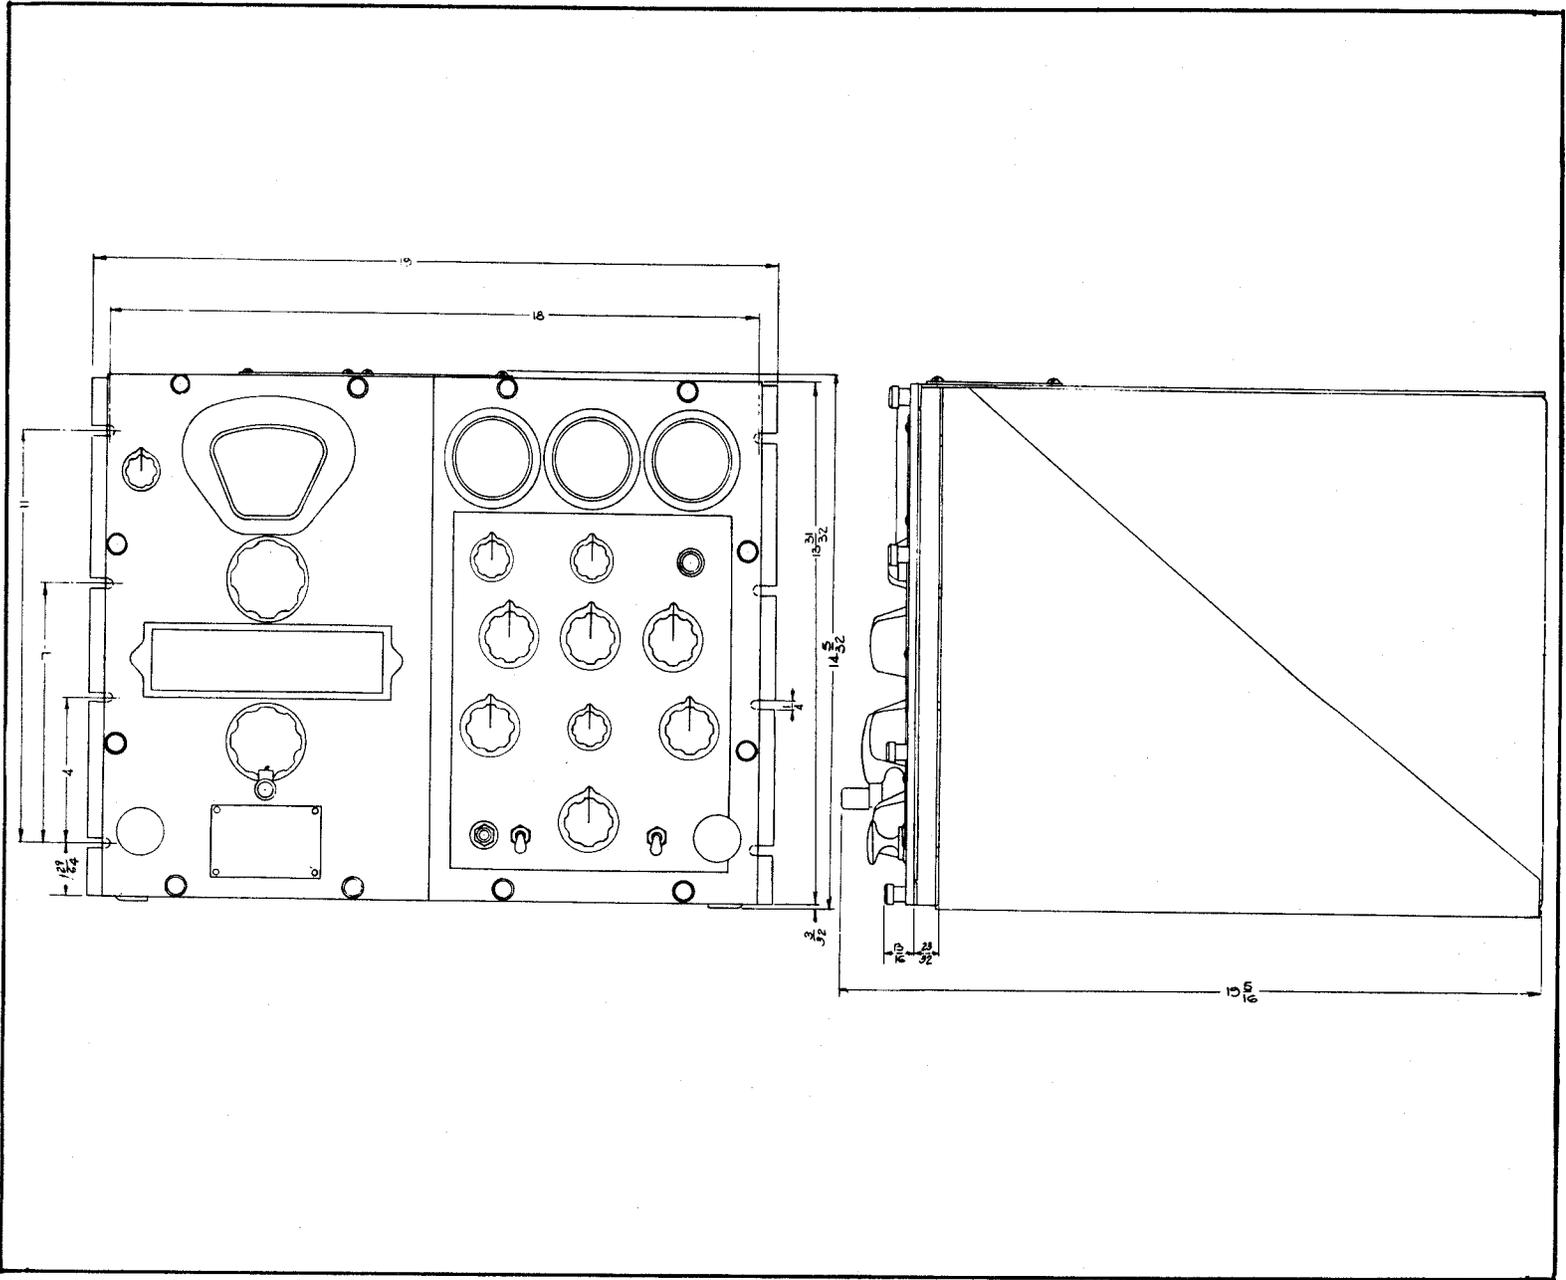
RBB-6/RBC-6 Rock-Mounting Dimensions and Outline
